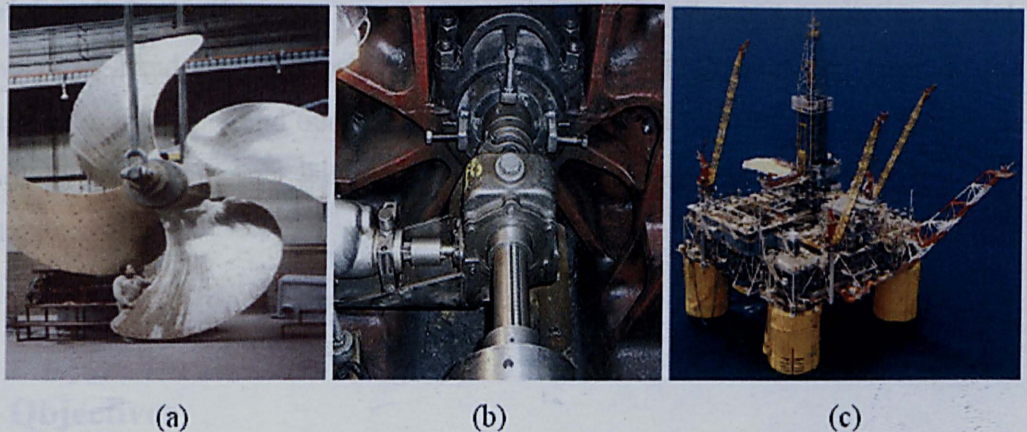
The example application of marine alloys: (a) Propellers ~ Cast nickel aluminium bronze (b) Portable line boring of compressor saddle and caps ~ Cast iron (c) Oil platform ~ 316 stainless steel housing, stainless steel bolts/nuts, flange in super duplex
